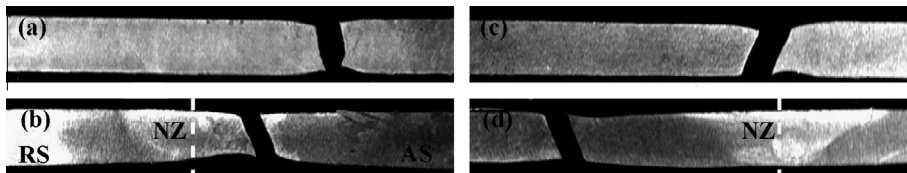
Side views of failed tensile specimens: (a) as-rolled sheet, (b) joint of as-rolled sheet, (c) as-annealed sheet and (d) joint of as-annealed sheet.
